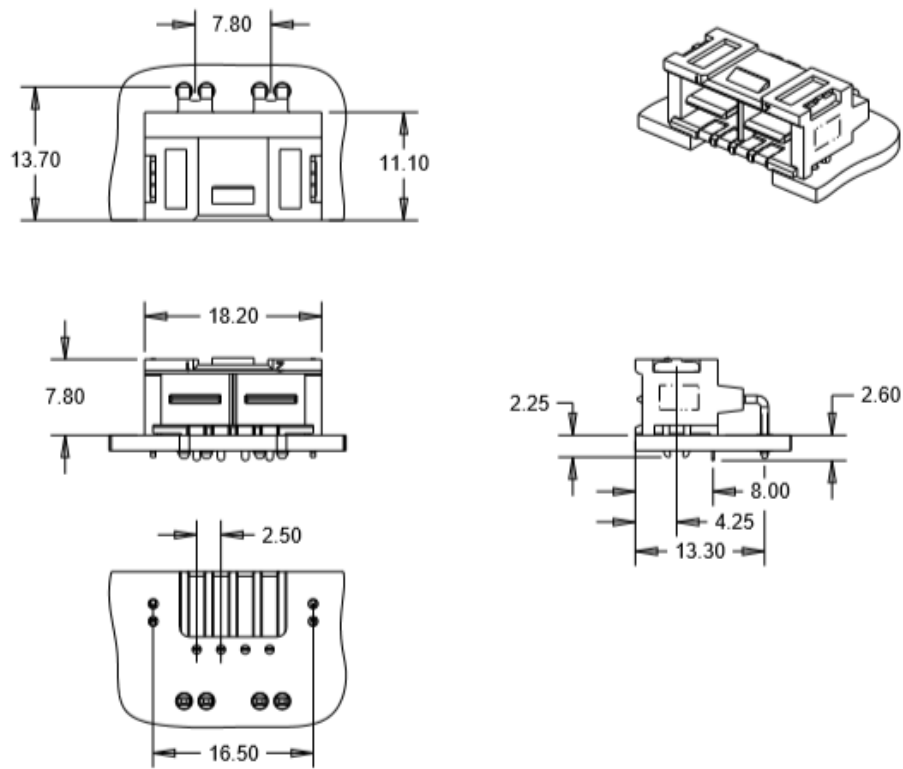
48VHPWR Right Angle Through-Hole Header Drawing
